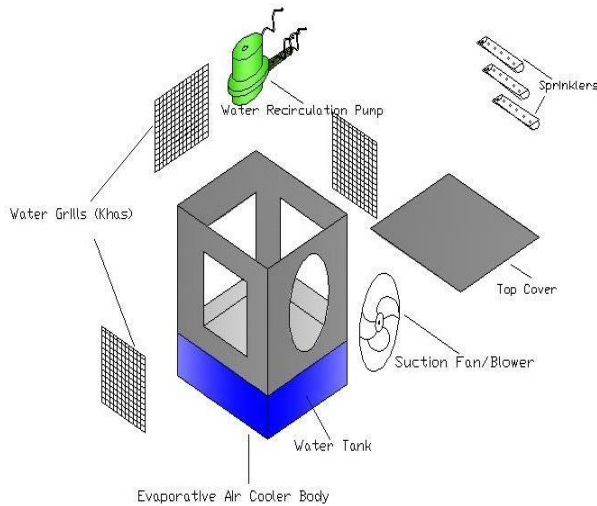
Parts drawing of the solar powered evaporative air cooler
